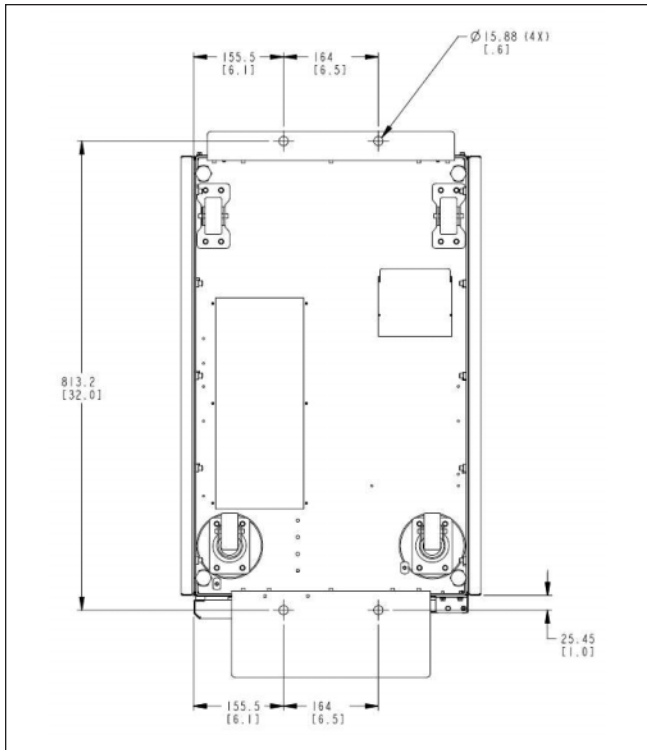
9390 (40–80 kVA) UPS Floor-Mounted
